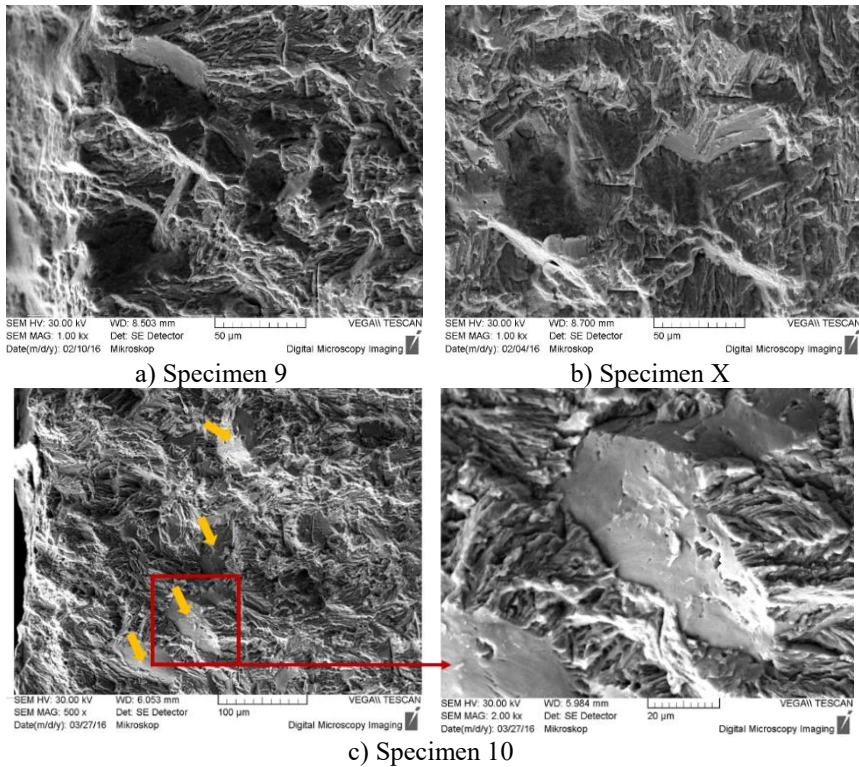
Intergranular decohesion on fracture surface
